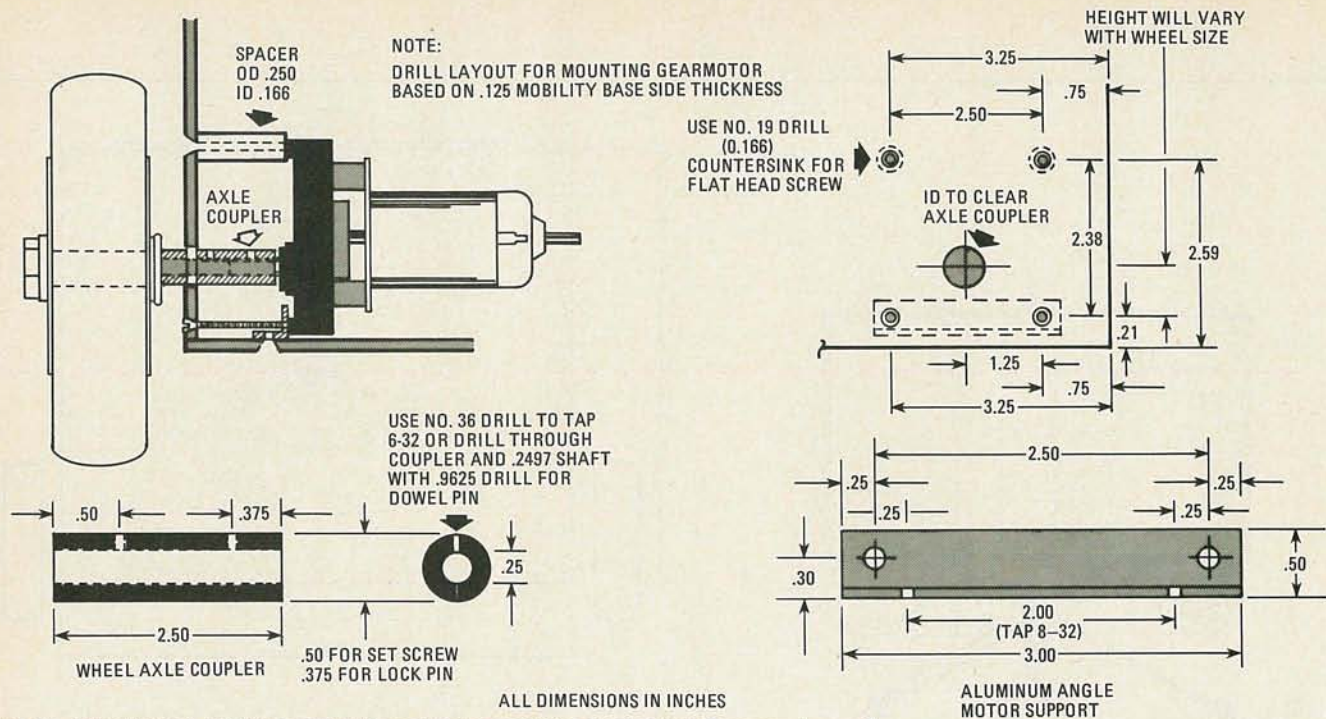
MECHANICAL DETAILS of 22-RPM gear-motor mounting. Some dimensions may change if sizes of wheel or wheel-shaft you use differ from those used by author.
